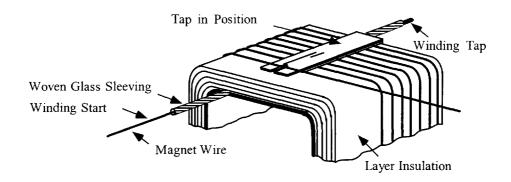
Tap Lead Crossing Over a Winding, Using Sleeving.
